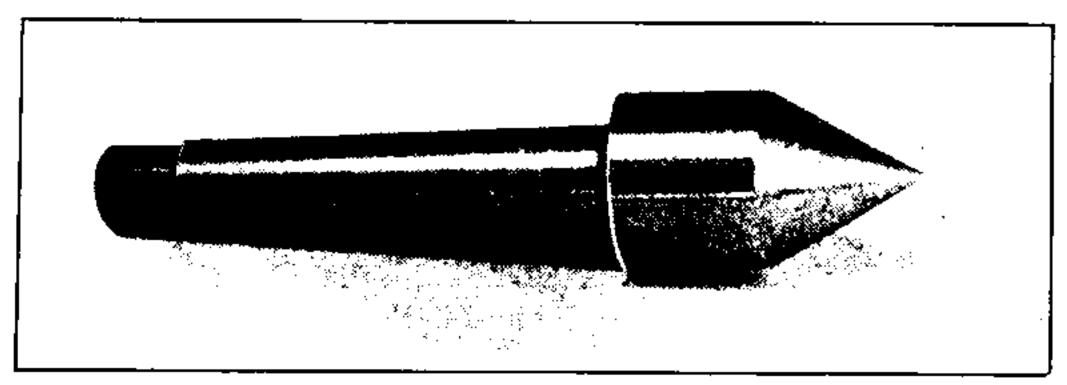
Male Center — 27/32" diameter, 60° included angle, shank Rivett special 3° taper. Furnished hard for tailstock and soft for headstock
